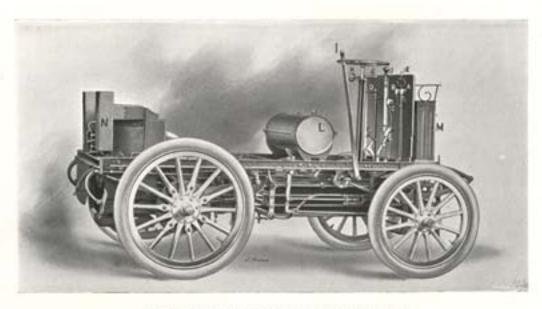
Frame and Mechanism of Serpollet Steam Car
